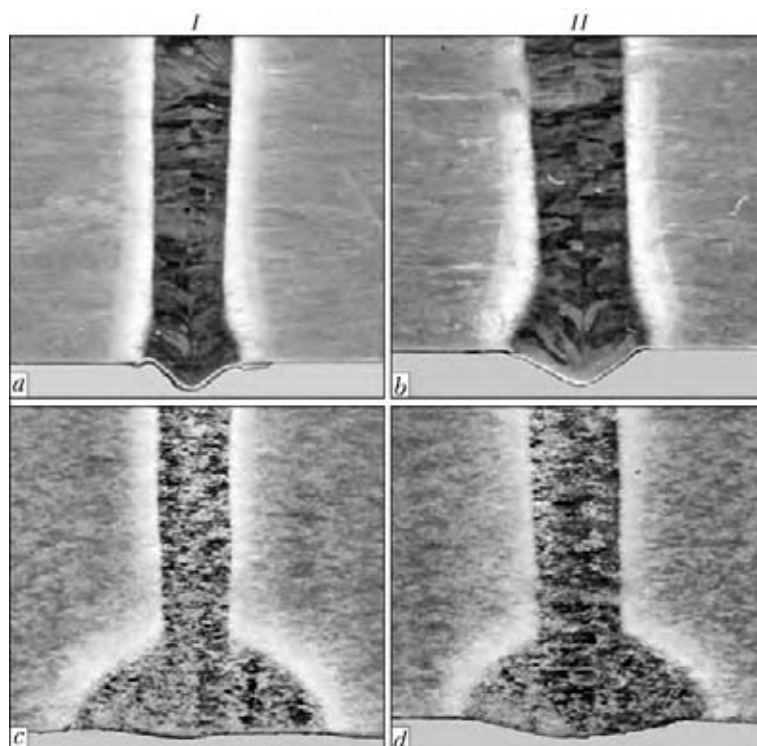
Macrostructure ($\times 27.5$) of welded joints of alloy VT20 and formation of weld reverse beads of 1.2 (I) and 1.8 (II) mm before (a, b) and after (c, d) their finishing smoothing
